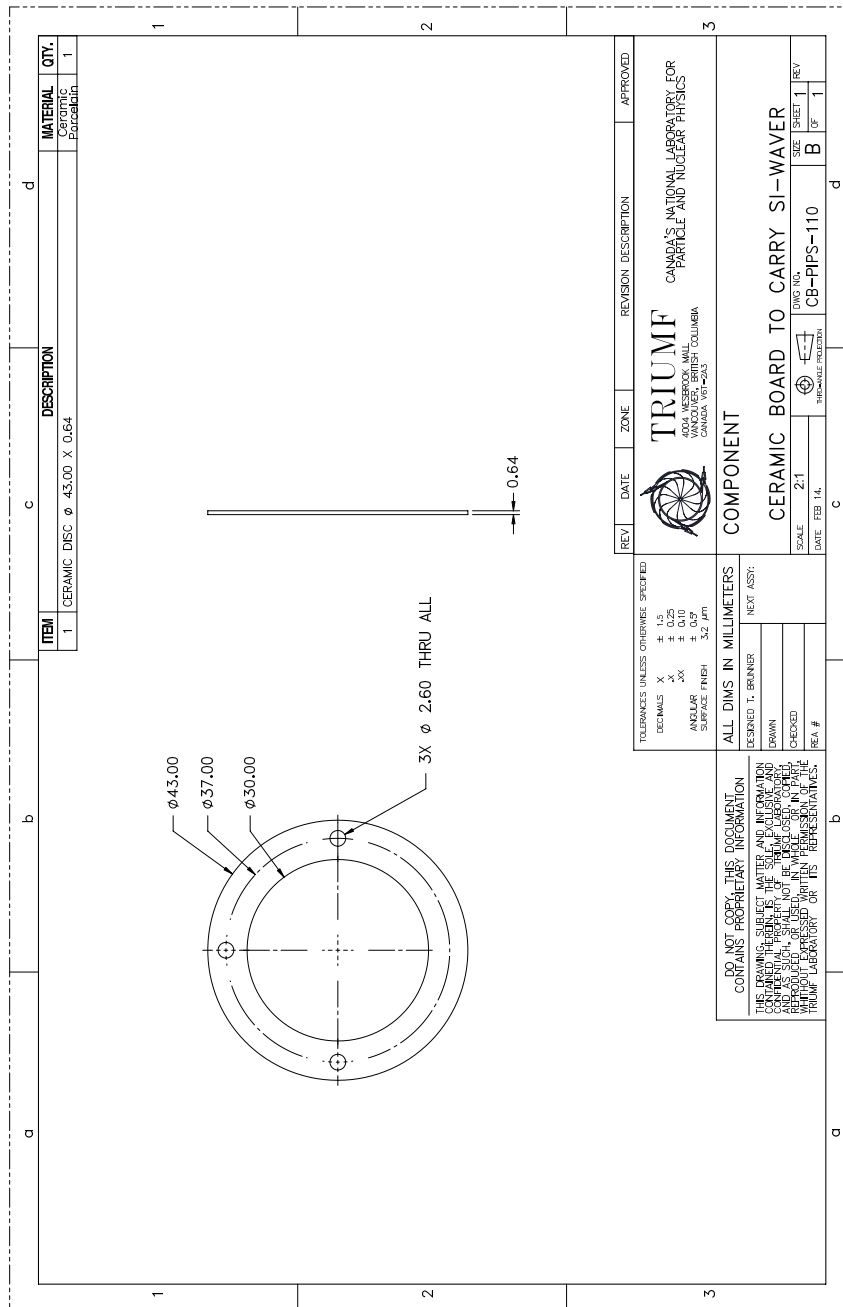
Drawing of the ceramic carrier board for a 600 mm² PIPS detector.
